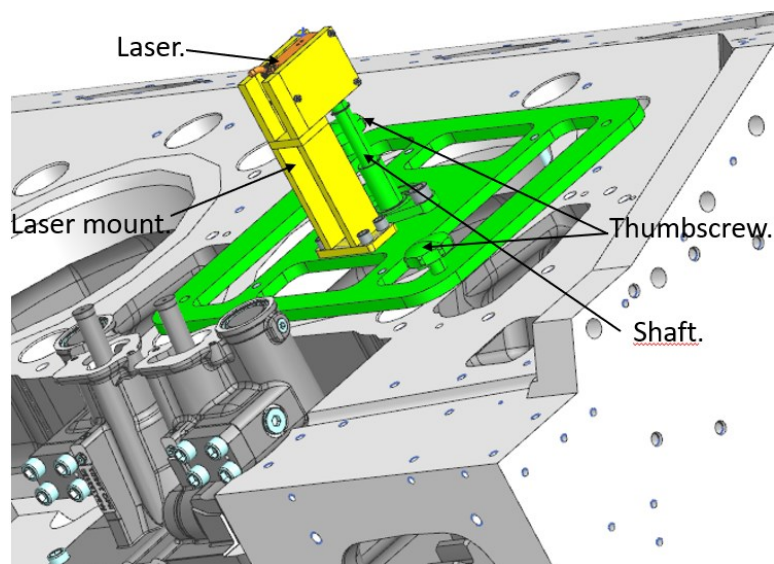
Illustration of TDC measurement device mounted to the engine block.
